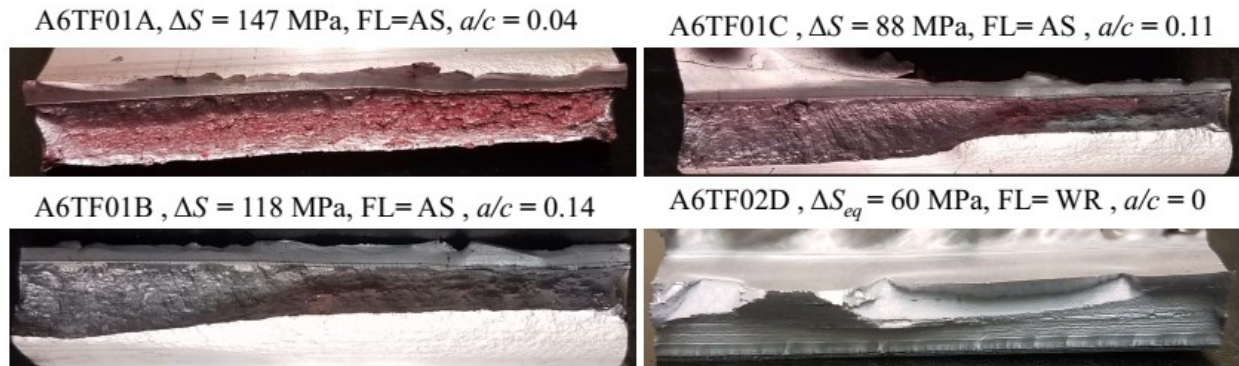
Fracture surfaces of specimens with significant toe flash
